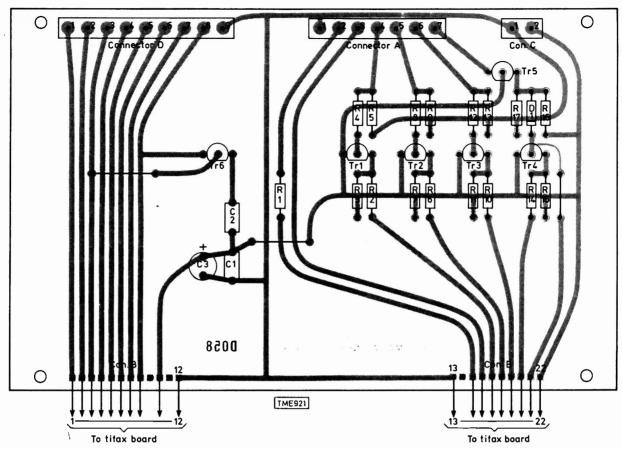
Component location diagram for the interface board. Molex 0.2" connectors may be used, or the cables can be soldered directly to the board.
